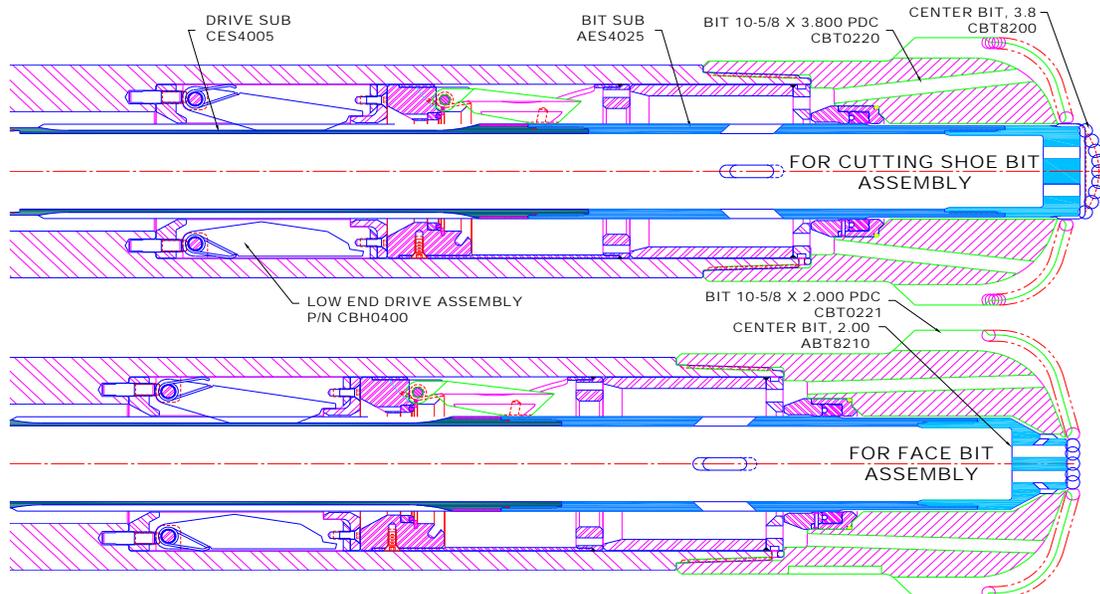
, Center Bit Assembly, Top – Cutting Shoe Assembly, Bottom – Face Bit Assembly
